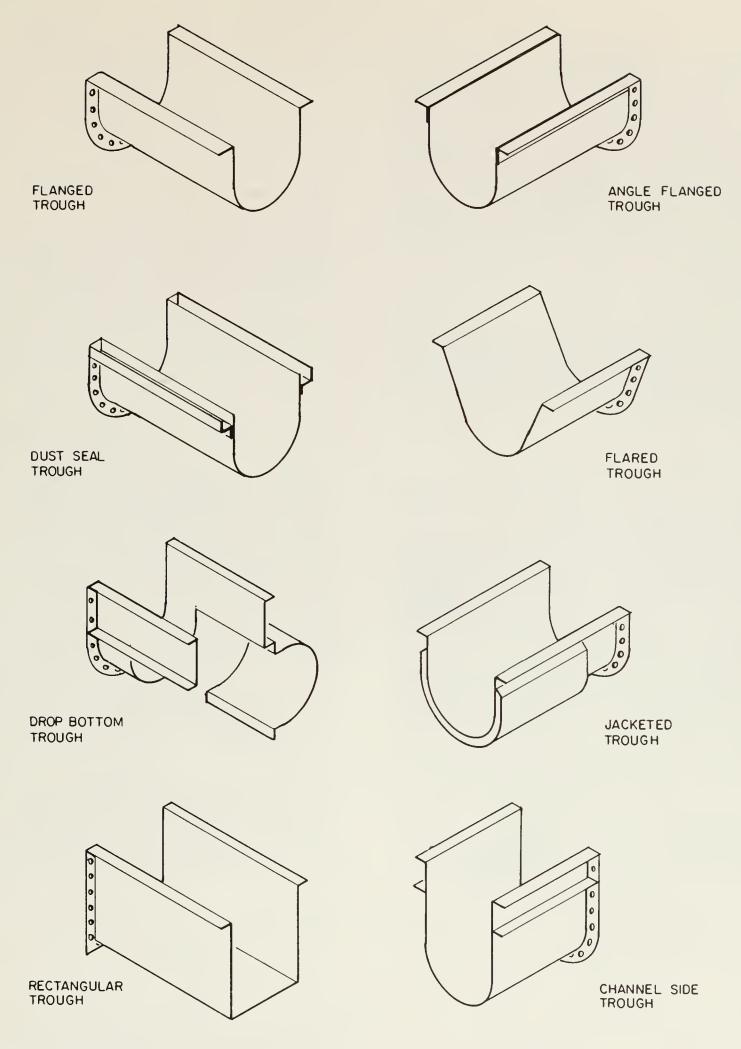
Trough shapes. Source: Screw conveyor engineering catalog no. 7700.
